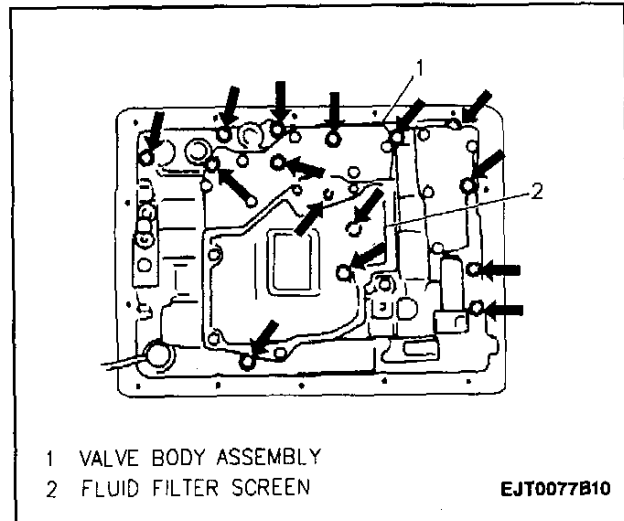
Valve Body Bolt Location (03-72LE, 4-Speed)
